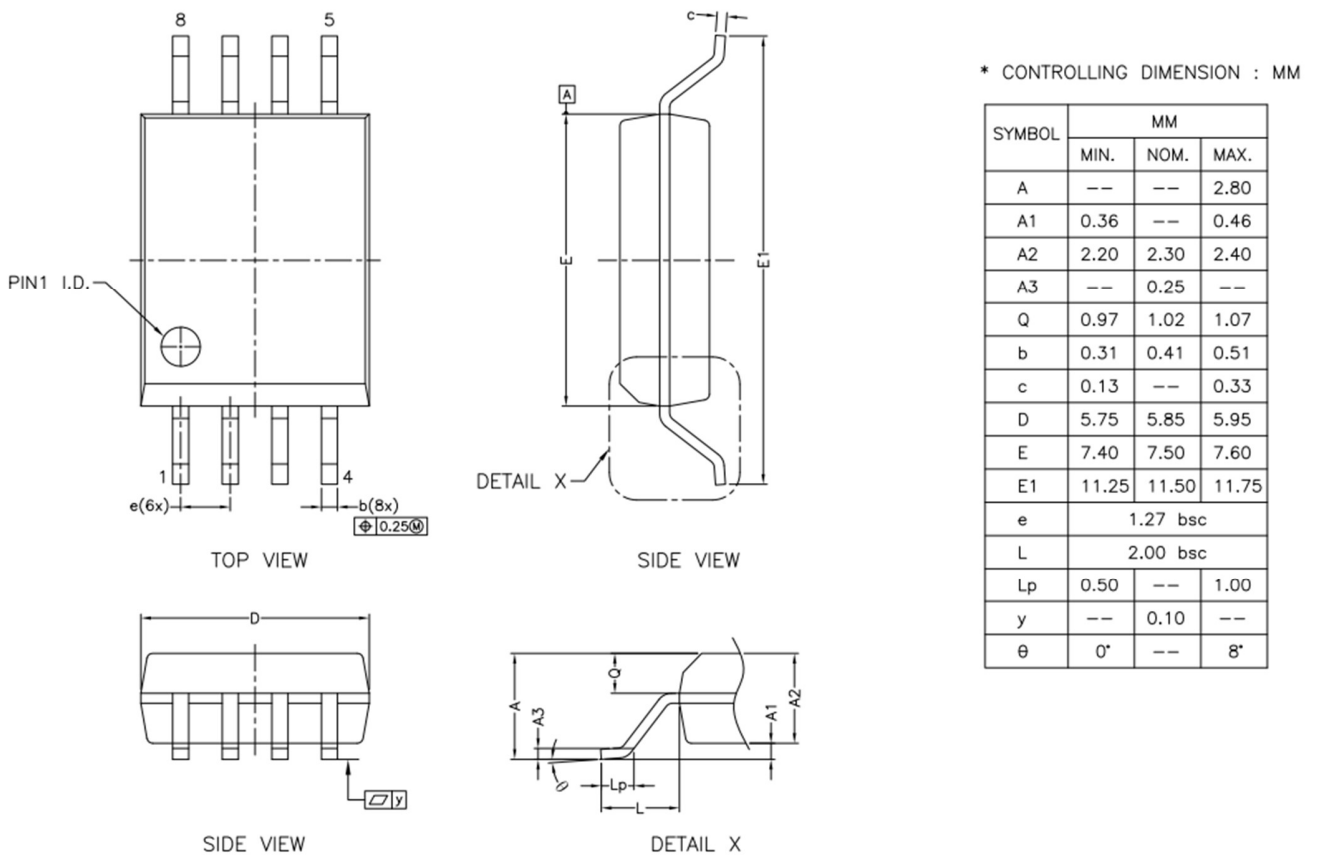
SOW8 Package Shape and Dimension in millimeters
